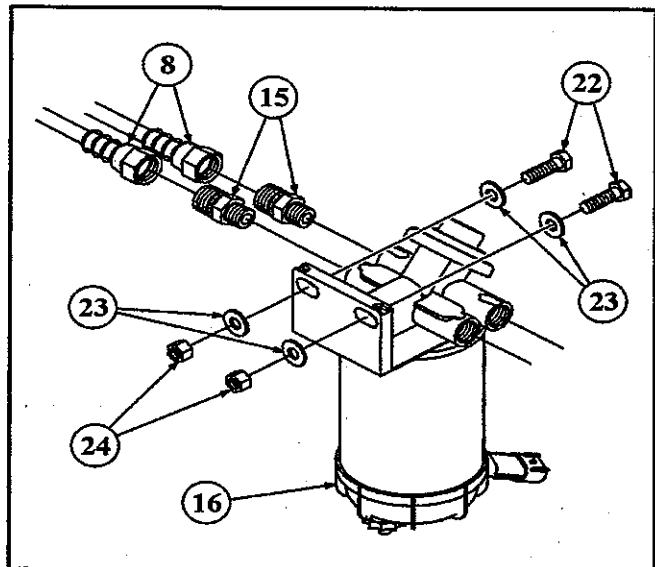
Racor 490R-12-10 Fuel Filter/Water Separator
